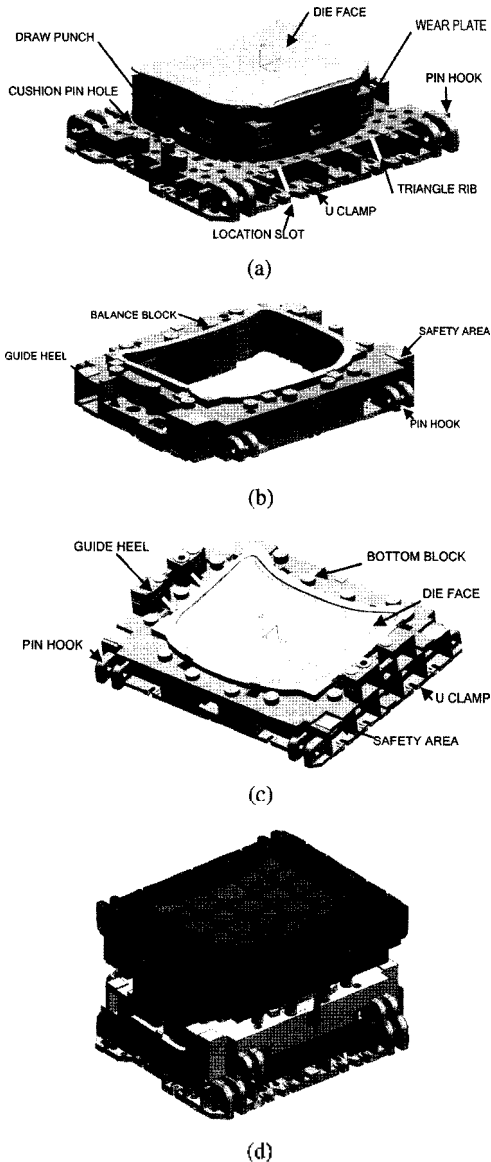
Structure of draw die: (a) lower die, (b) blank holder, (c) upper die, (d) die assembly.
